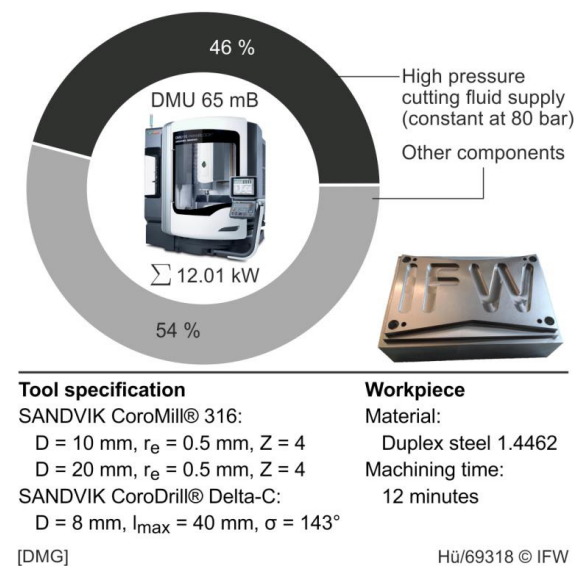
Testing machine tool DMU 65, workpiece and energy consumption.
